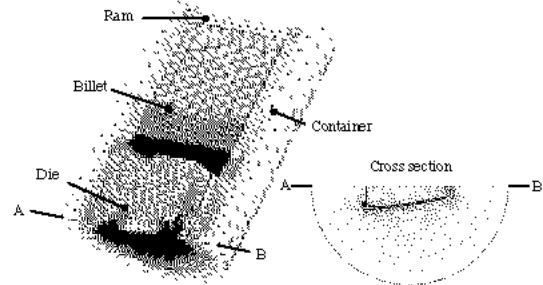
Initial meshes of the billet, container, die and ram and cross-section of die bearing
